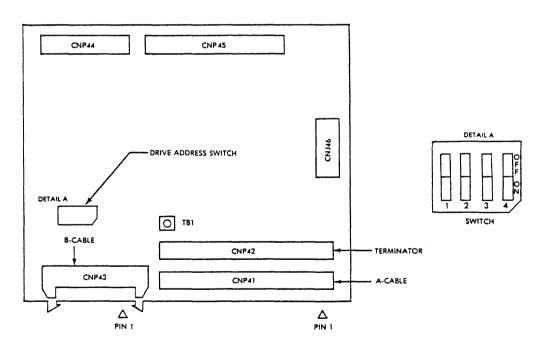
SI 9751 Interface PCB (DQEMU)
